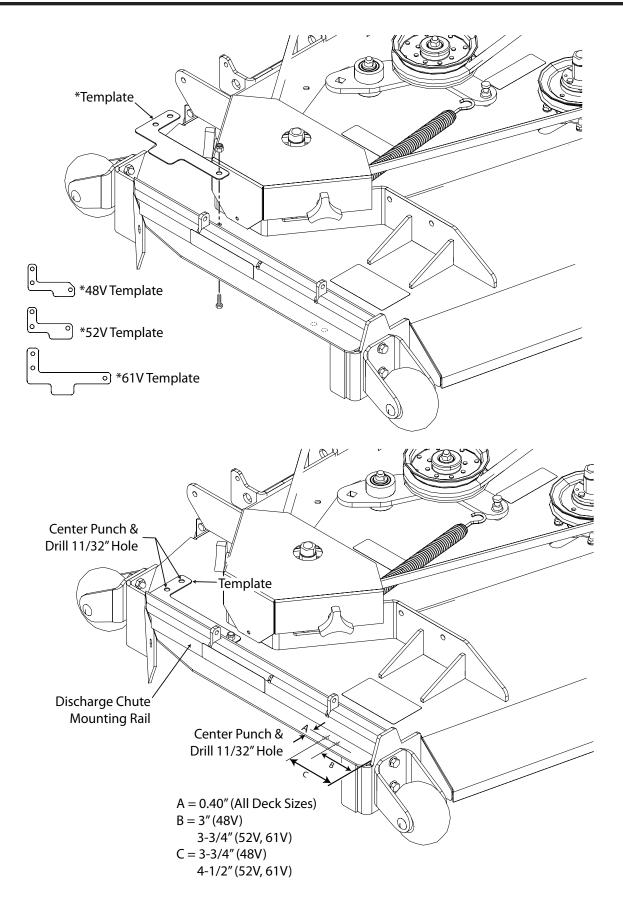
Locating and Drilling the Mounting Holes for SVR-48V/52V/61V
